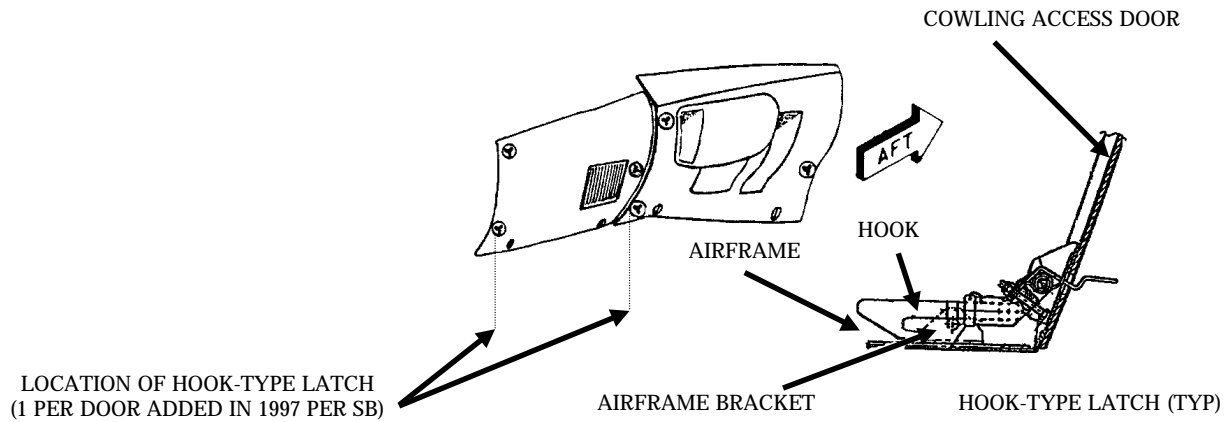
BK 117 Cowling Access Door Latch Assembly
